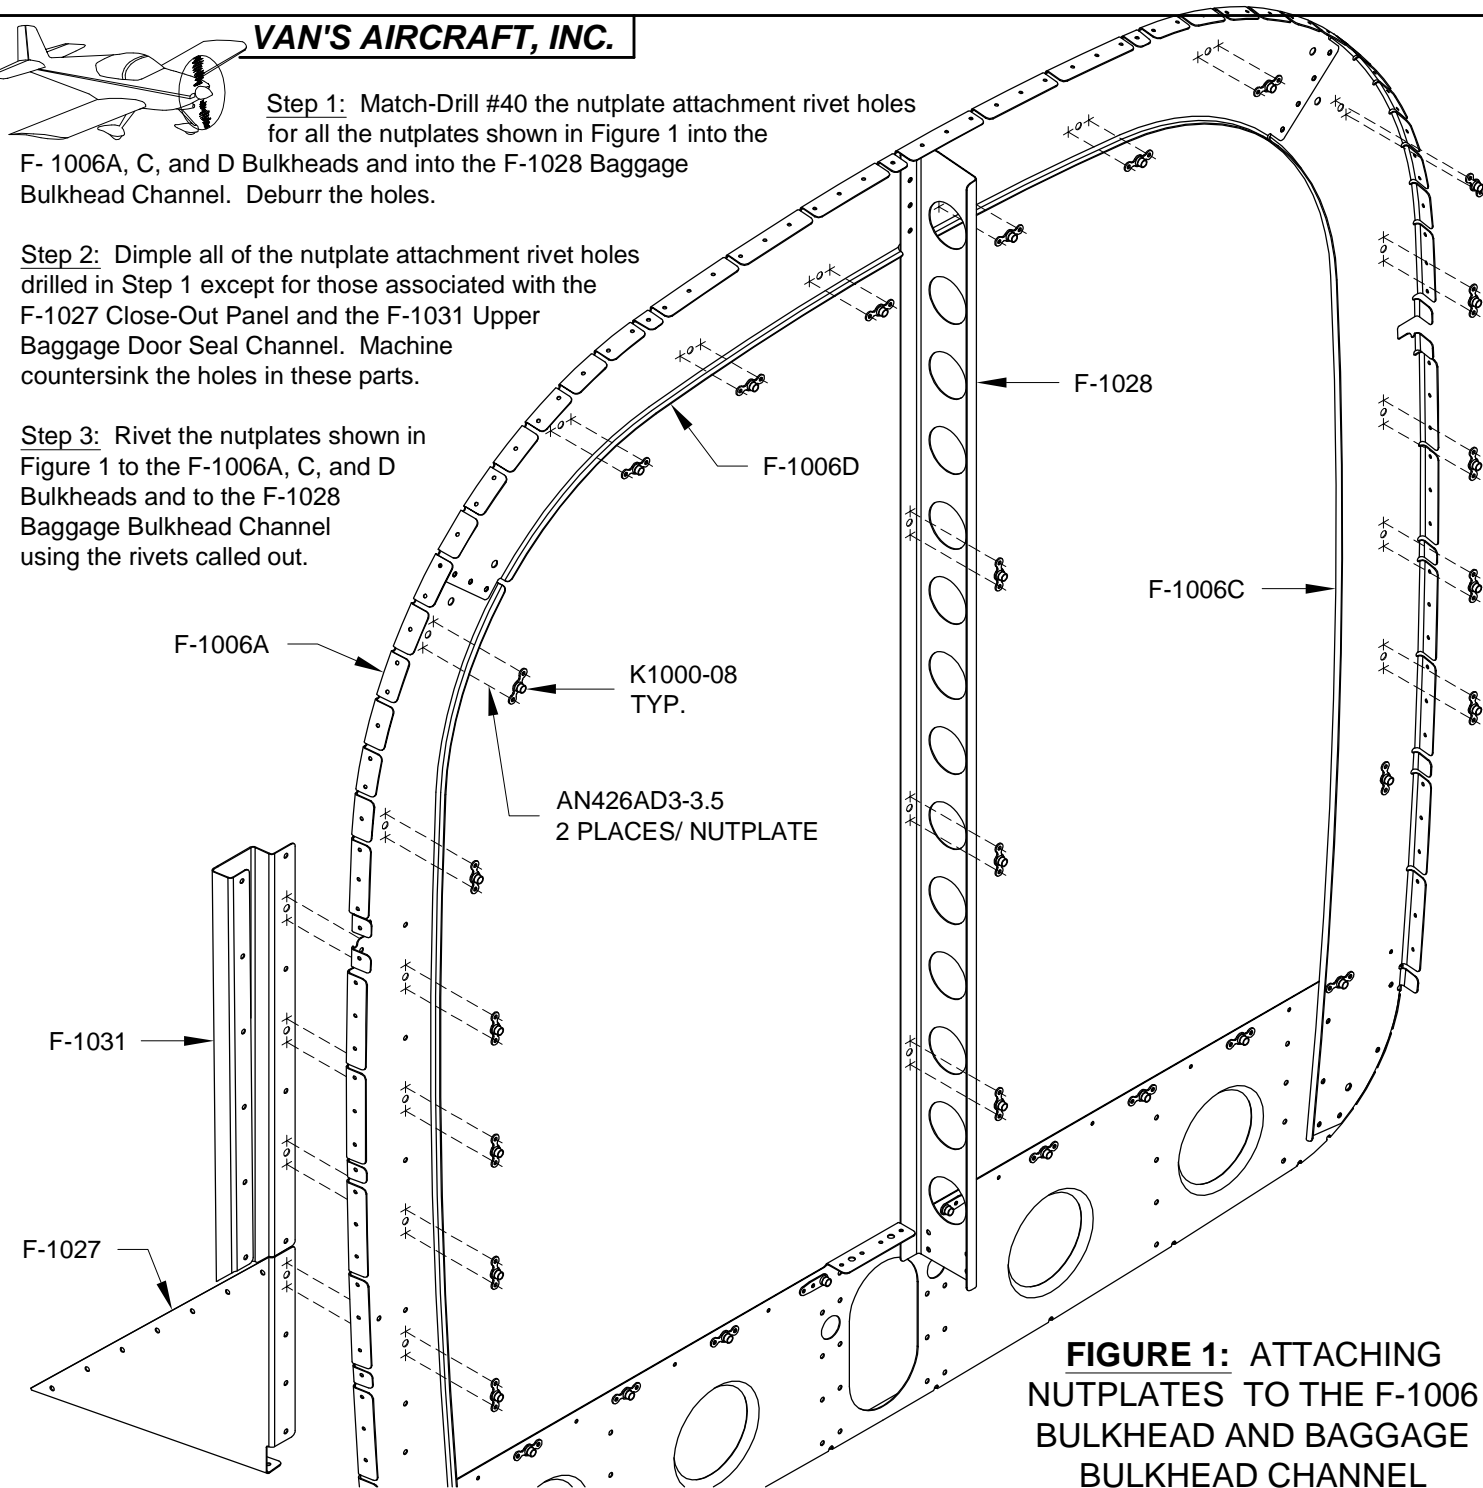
ATTACHING NUTPLATES TO THE F-1006 BULKHEAD AND BAGGAGE BULKHEAD CHANNEL
